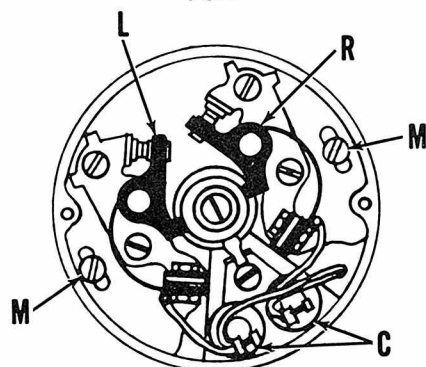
Ignition breaker point assembly (L) is for left cylinder, other points (R) are for right cylinder. The back plate assembly can be moved for timing after loosening the two mounting screws (M). Condensers are shown at (C).
